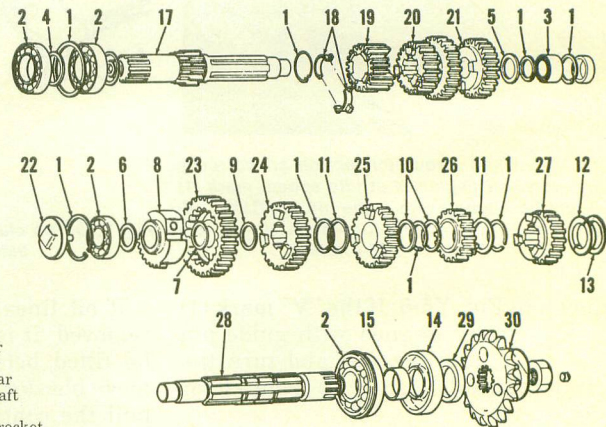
Exploded view of the transmission. Refer also to Fig. Y5-20.
